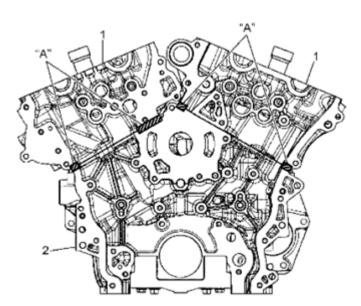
Applying Sealant To Mating Surface Of Cylinder Head And Cylinder Block Courtesy of SUZUKI OF AMERICA CORP.
